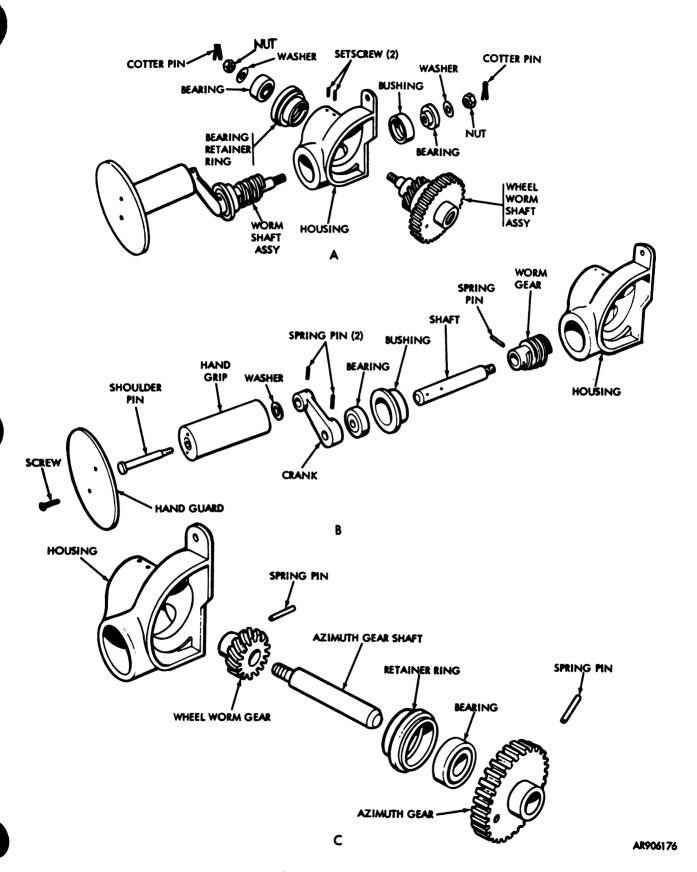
M1 cupola azimuth gearbox disassembly or assembly (vehicles serial numbered A3001 thru A3374).
